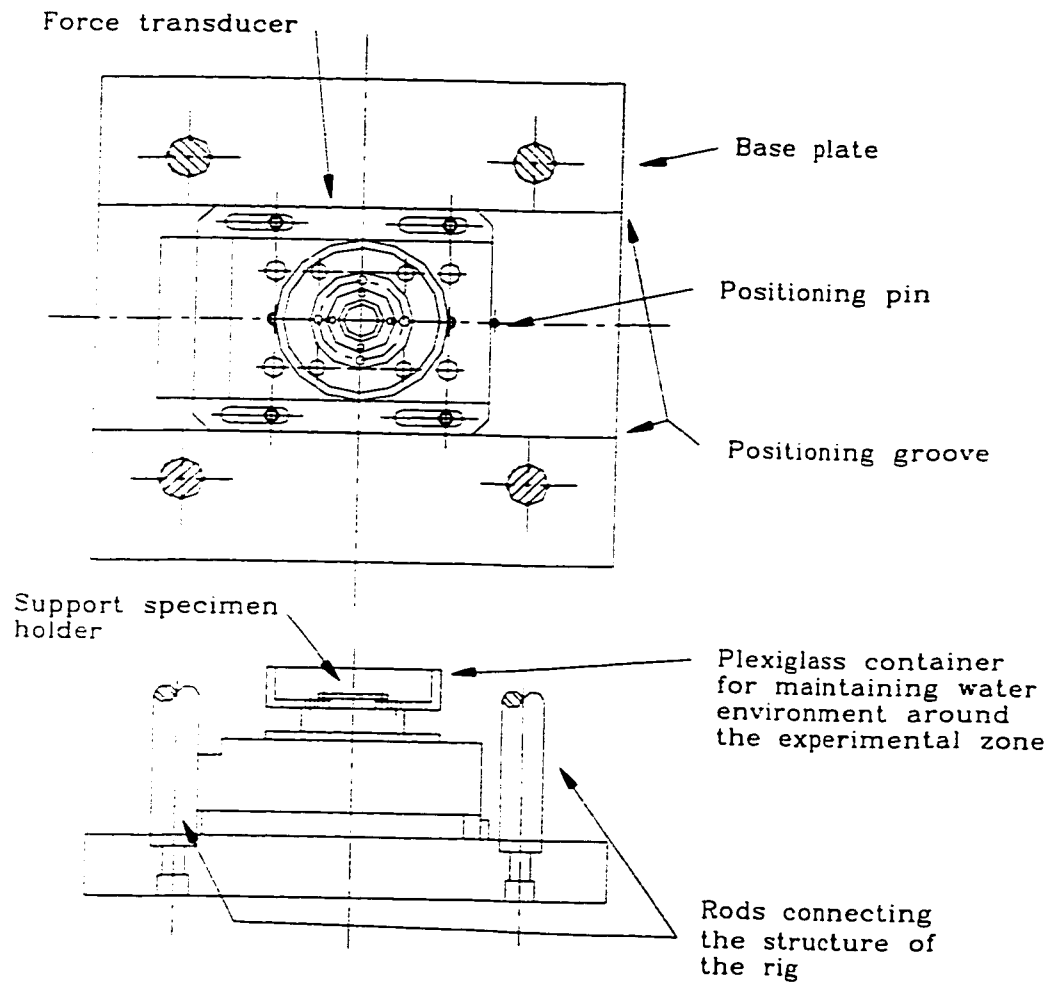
Sub-assembly drawing of the force transducer and specimen mount
